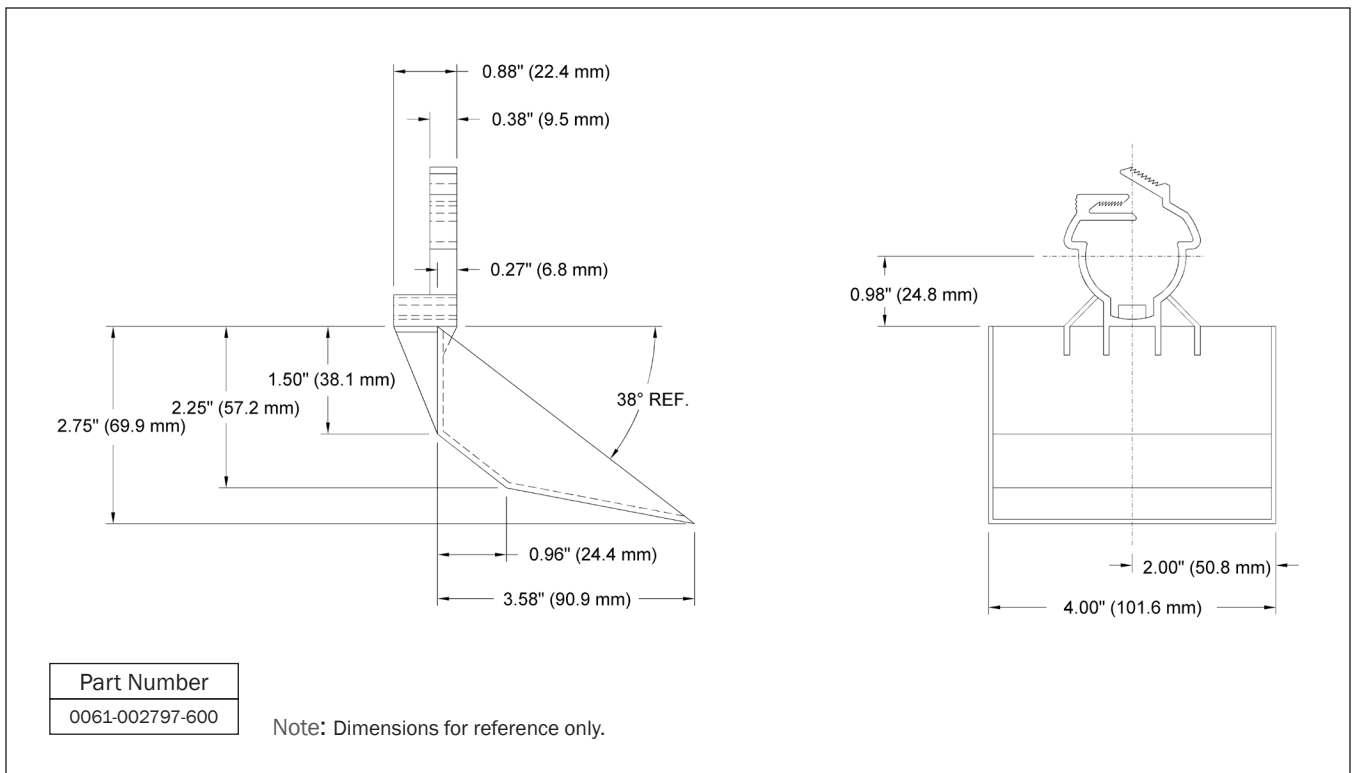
Drip Guard for draw-out expulsion fuse holder.
